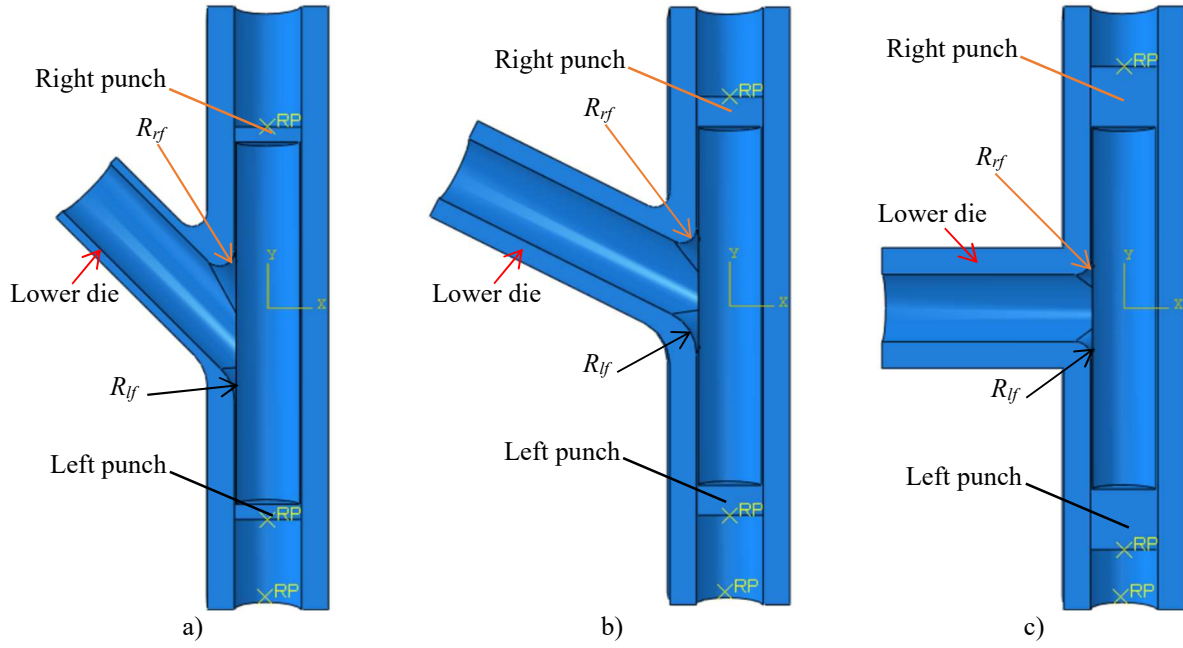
Assembly of the tube blank model and die for forming hollow joints: a) *HJ45*, b) *HJ60*, c) *HJ90
